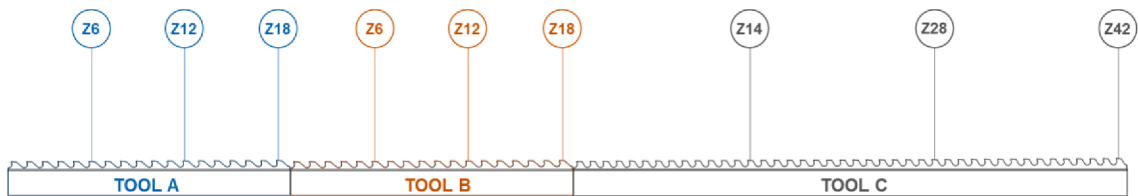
Broaching tool assembly and cutting tool. Numbers are for controlled teeth. Cutting starts at the left.
